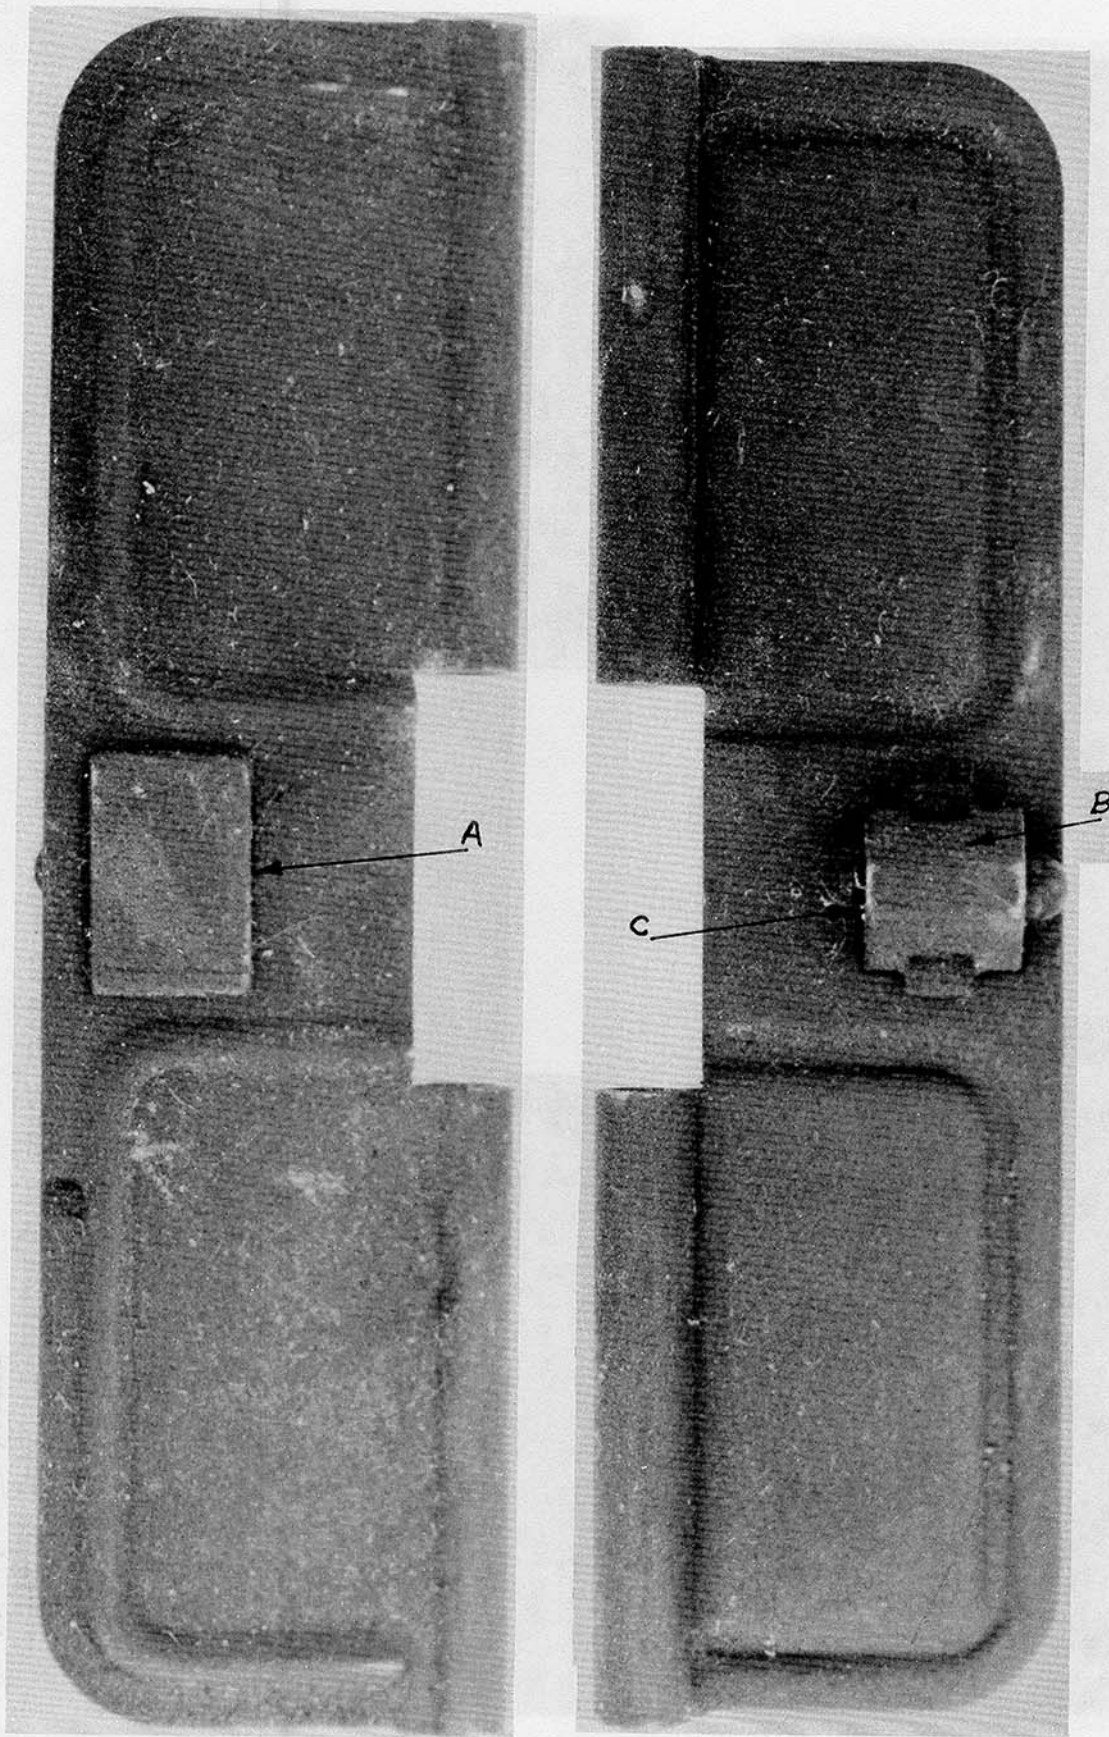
Colt M16A1 rifle SN 6418244, ejection port cover assembly. Outside view at top. Inside view at bottom.
